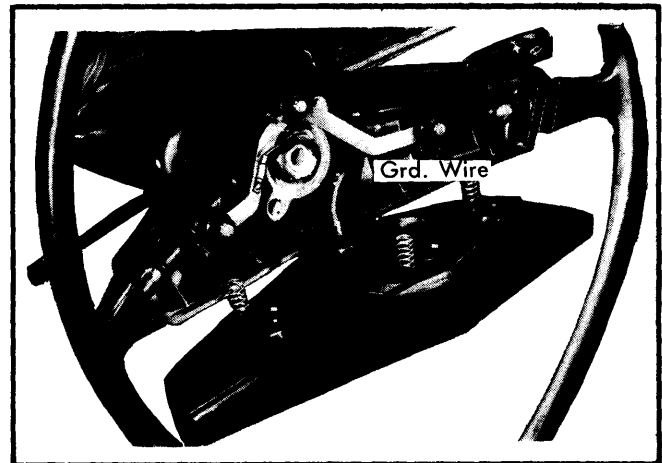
Removing Horn Bar/Protective Cover from Audi Fox
